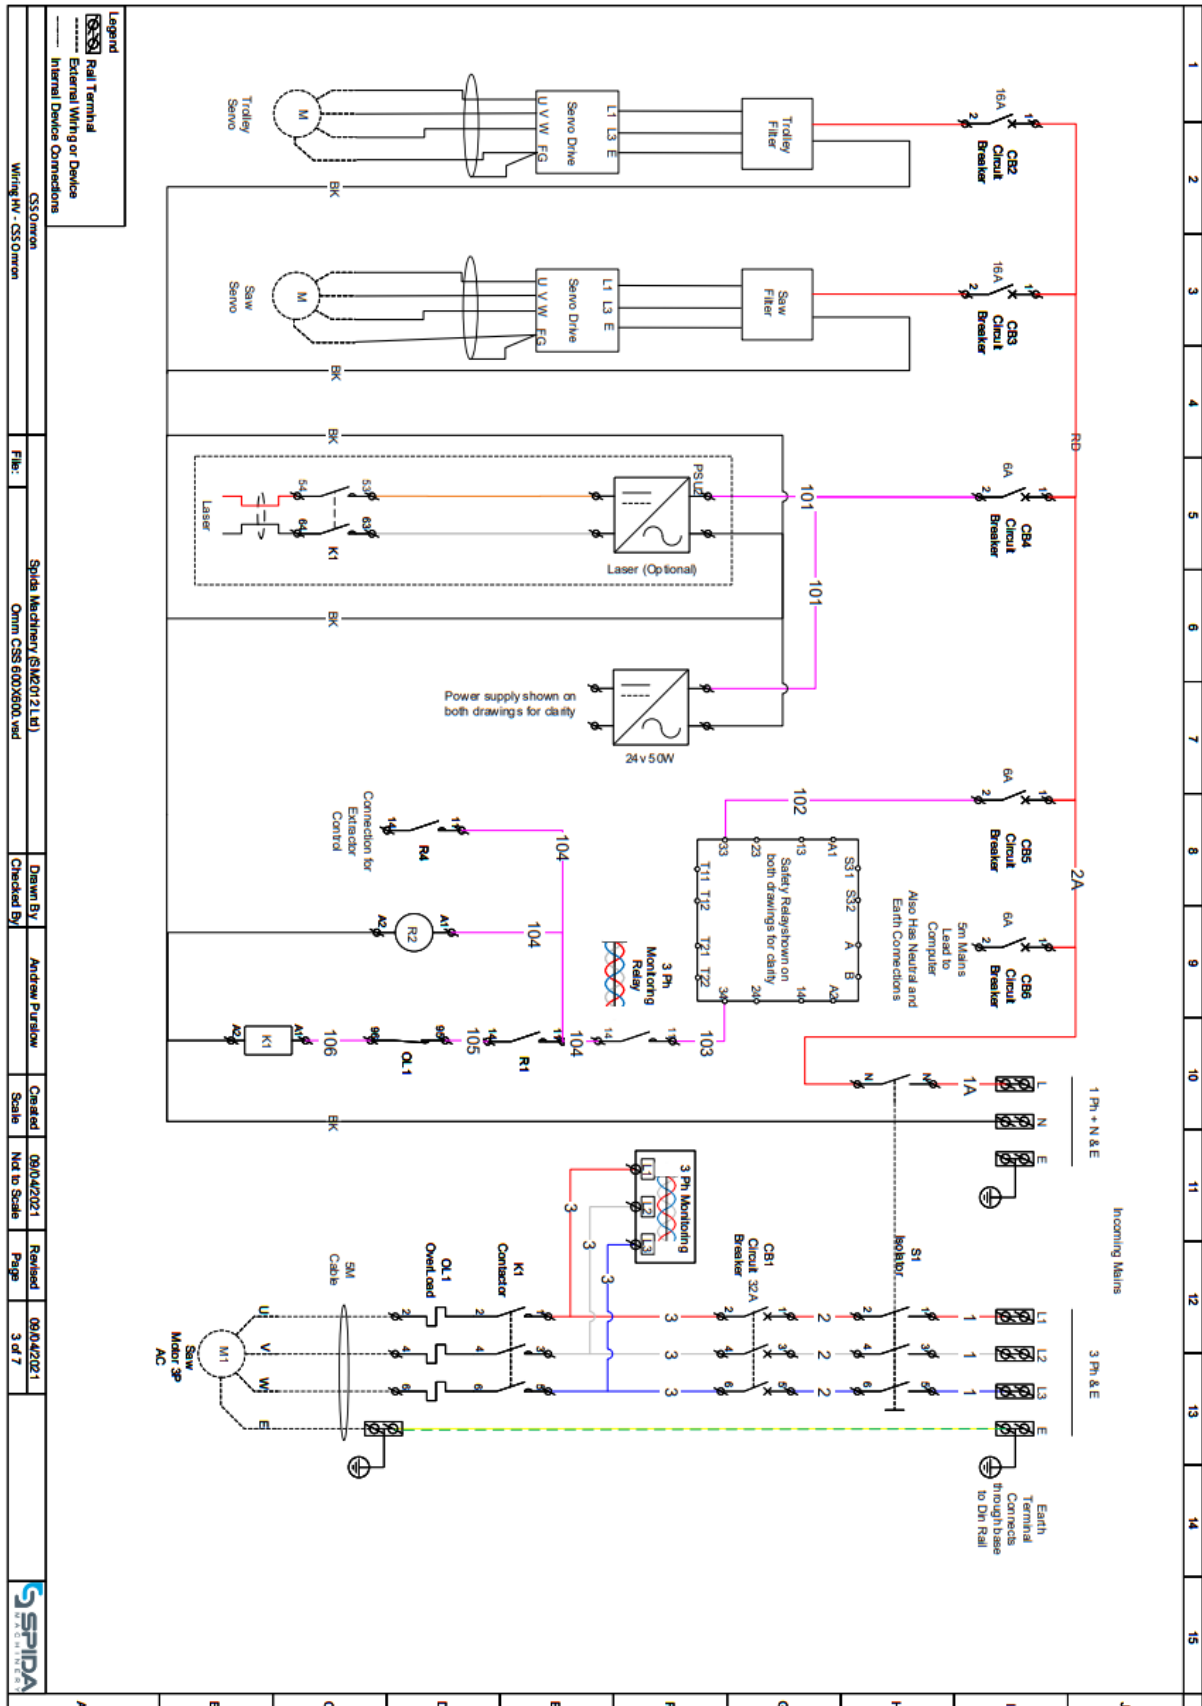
, Apollo Electrical Drawings NZ/AU part 3
